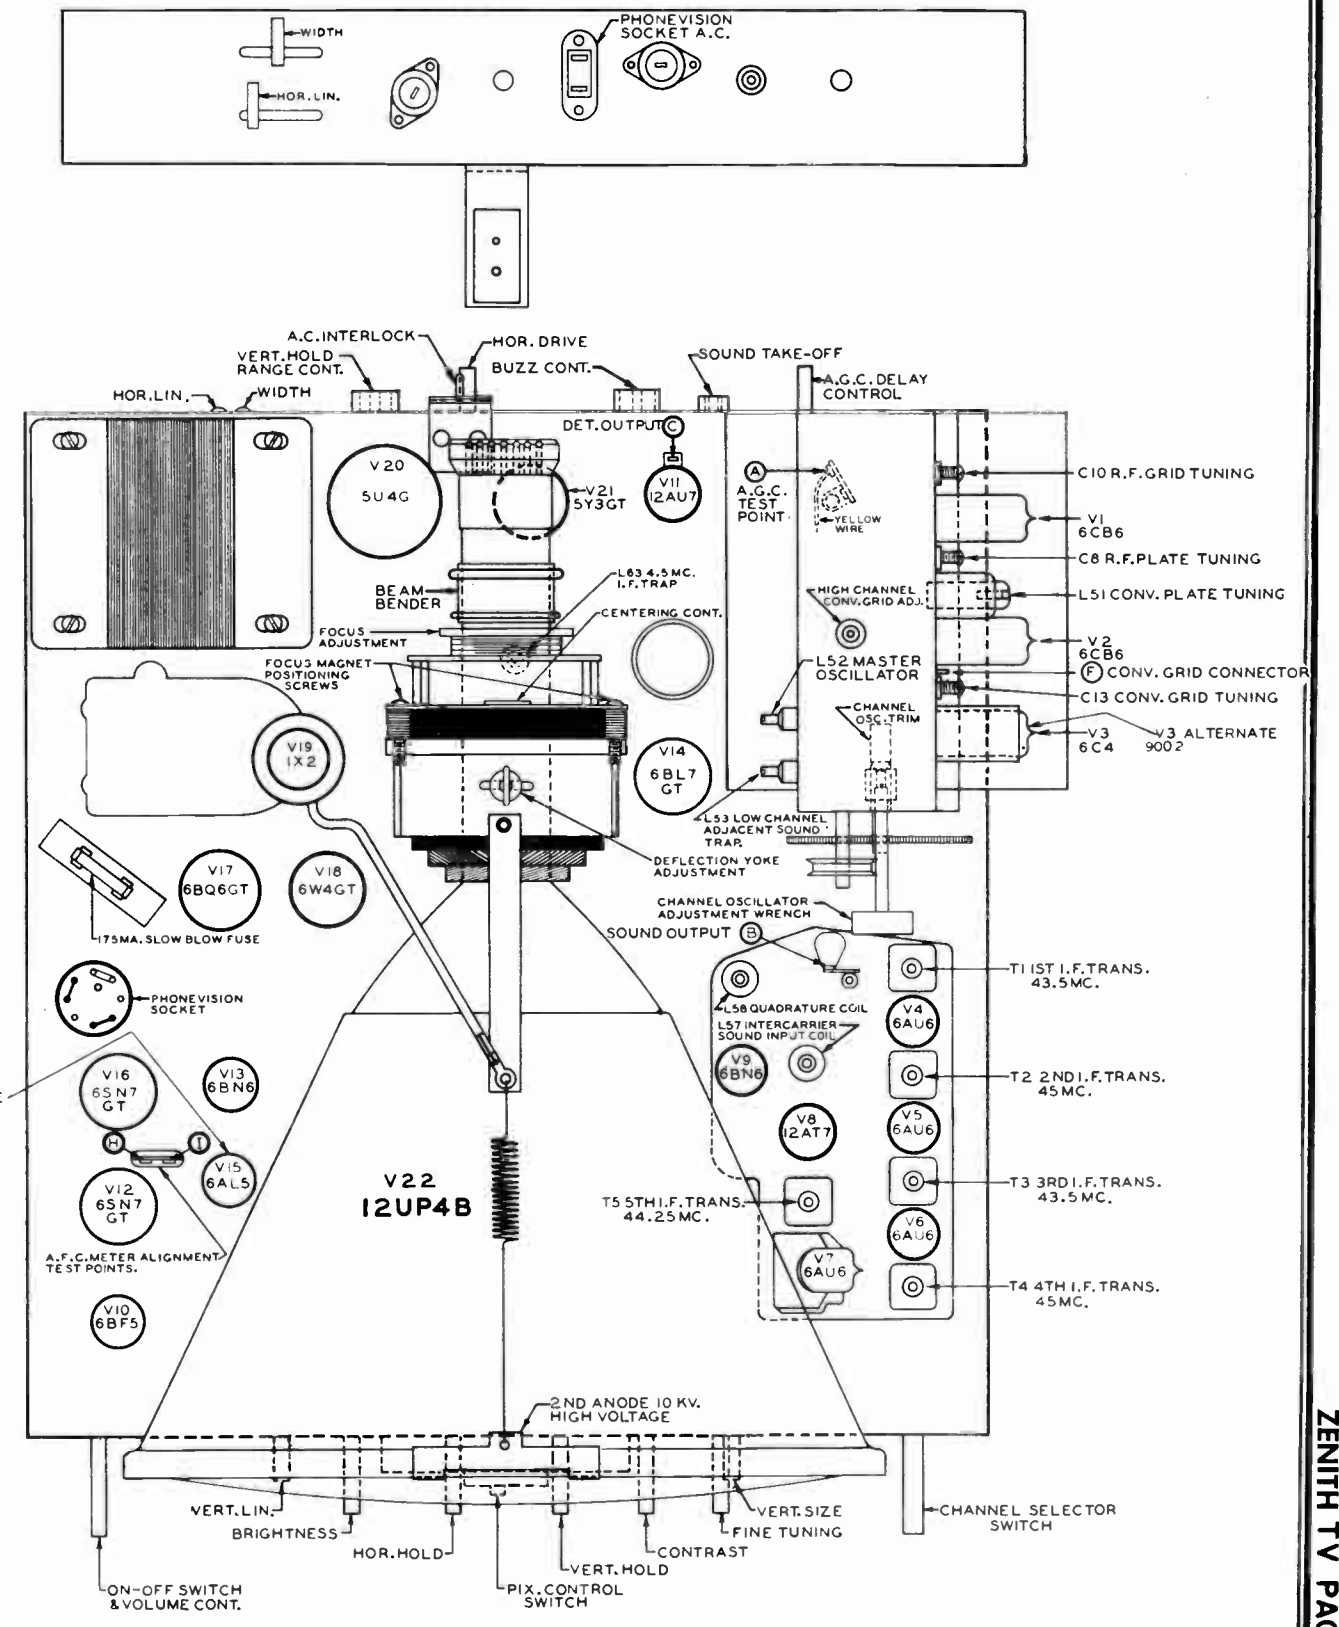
Tube and Trimmer Layout 22H20 Chassis.
